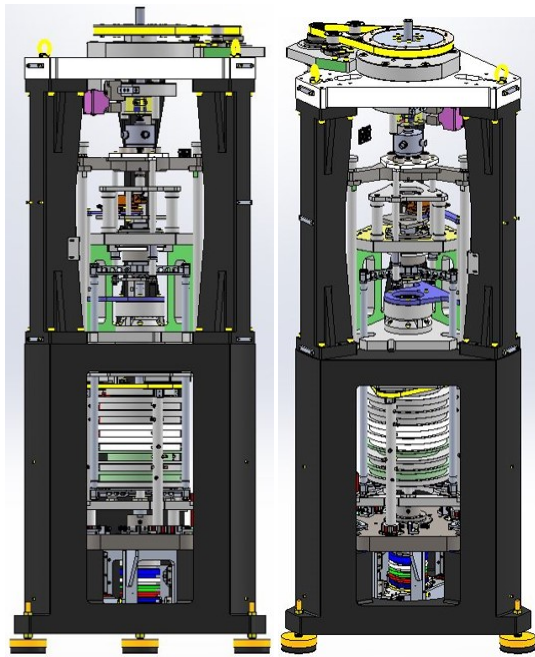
Rockwell-Brinell-Vickers hardness standard machine.
